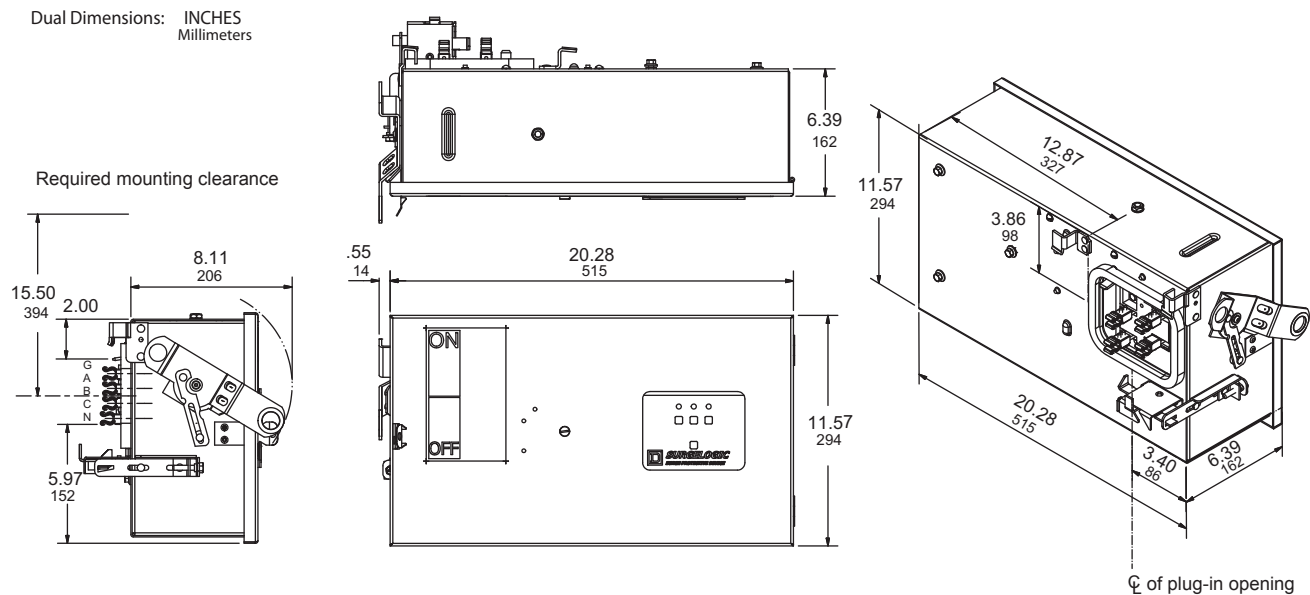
Surge Protective Devices-Dimensions, Required Mounting Clearance
